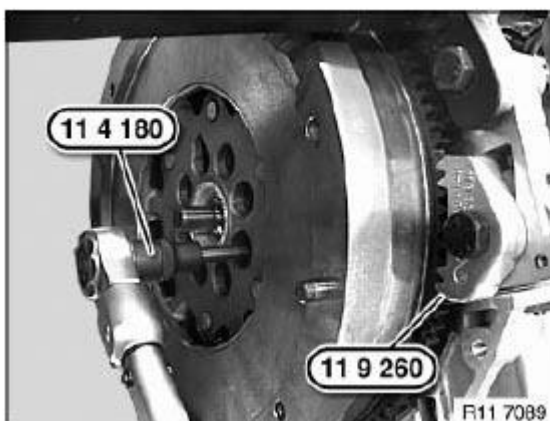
Releasing Flywheel Screws Using Special Tool 11 4 180
